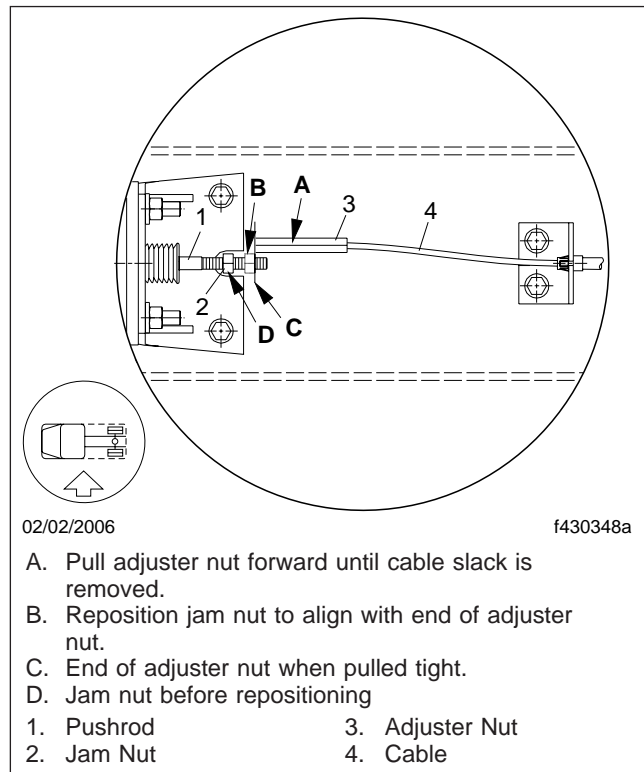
, Cable Adjustment, Air-Actuated Parking Brake
